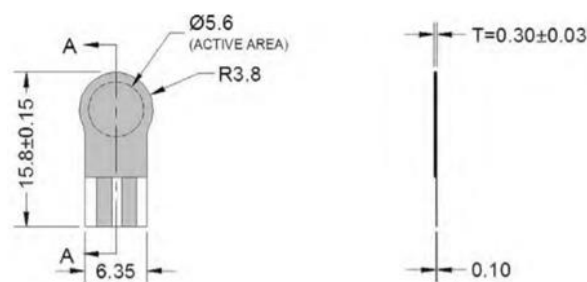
Model 400 round short tail force sensitive resistor dimensions (mm).
